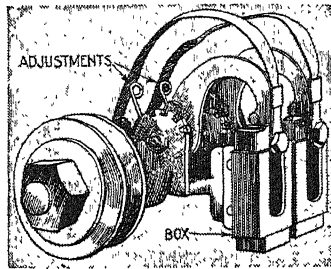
Bissell double brush holder. Flexible cables carry the current between the brushes and holders. This holder works equally well for forward or reverse rotation. Two or more holders are used on each stud except for the two smallest frames. The construction permits of adjustment or renewal of brush while the machine is in operation. Sufficient contact area of brush is provided to permit running on one carbon at ordinary loads in case the other becomes worn or inoperative.
